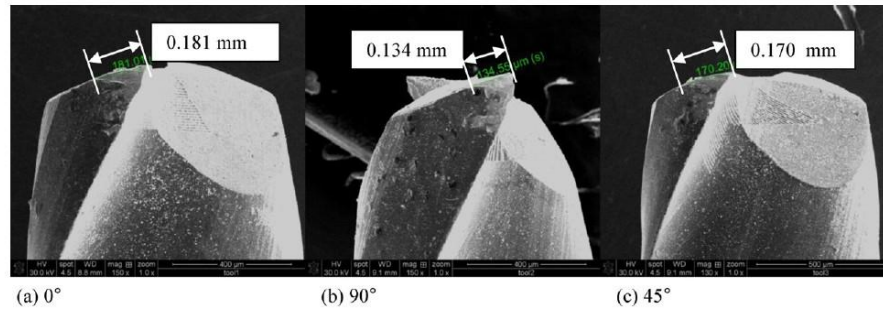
Measured flank tool wear of the microstructured tools after the third set of cutting trial.
